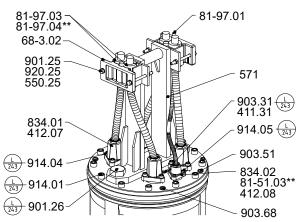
Cable gland and fastening, motors: 275 4 300 4, 250 6 340 6, 205 8 290 8
